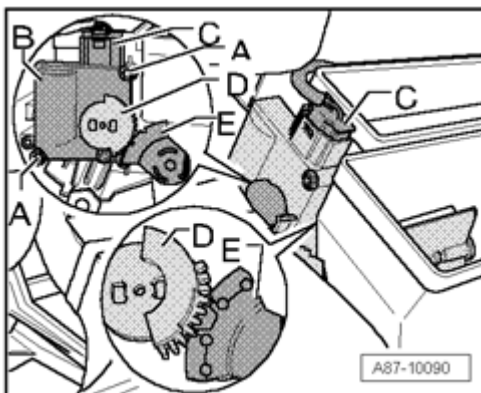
Identifying Connector, Bolts, Connecting Element, Flap, And Control Motor
